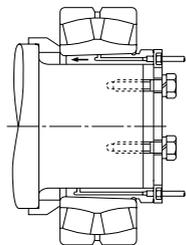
Mounting with Special Sleeve and Hydraulic Pressure
